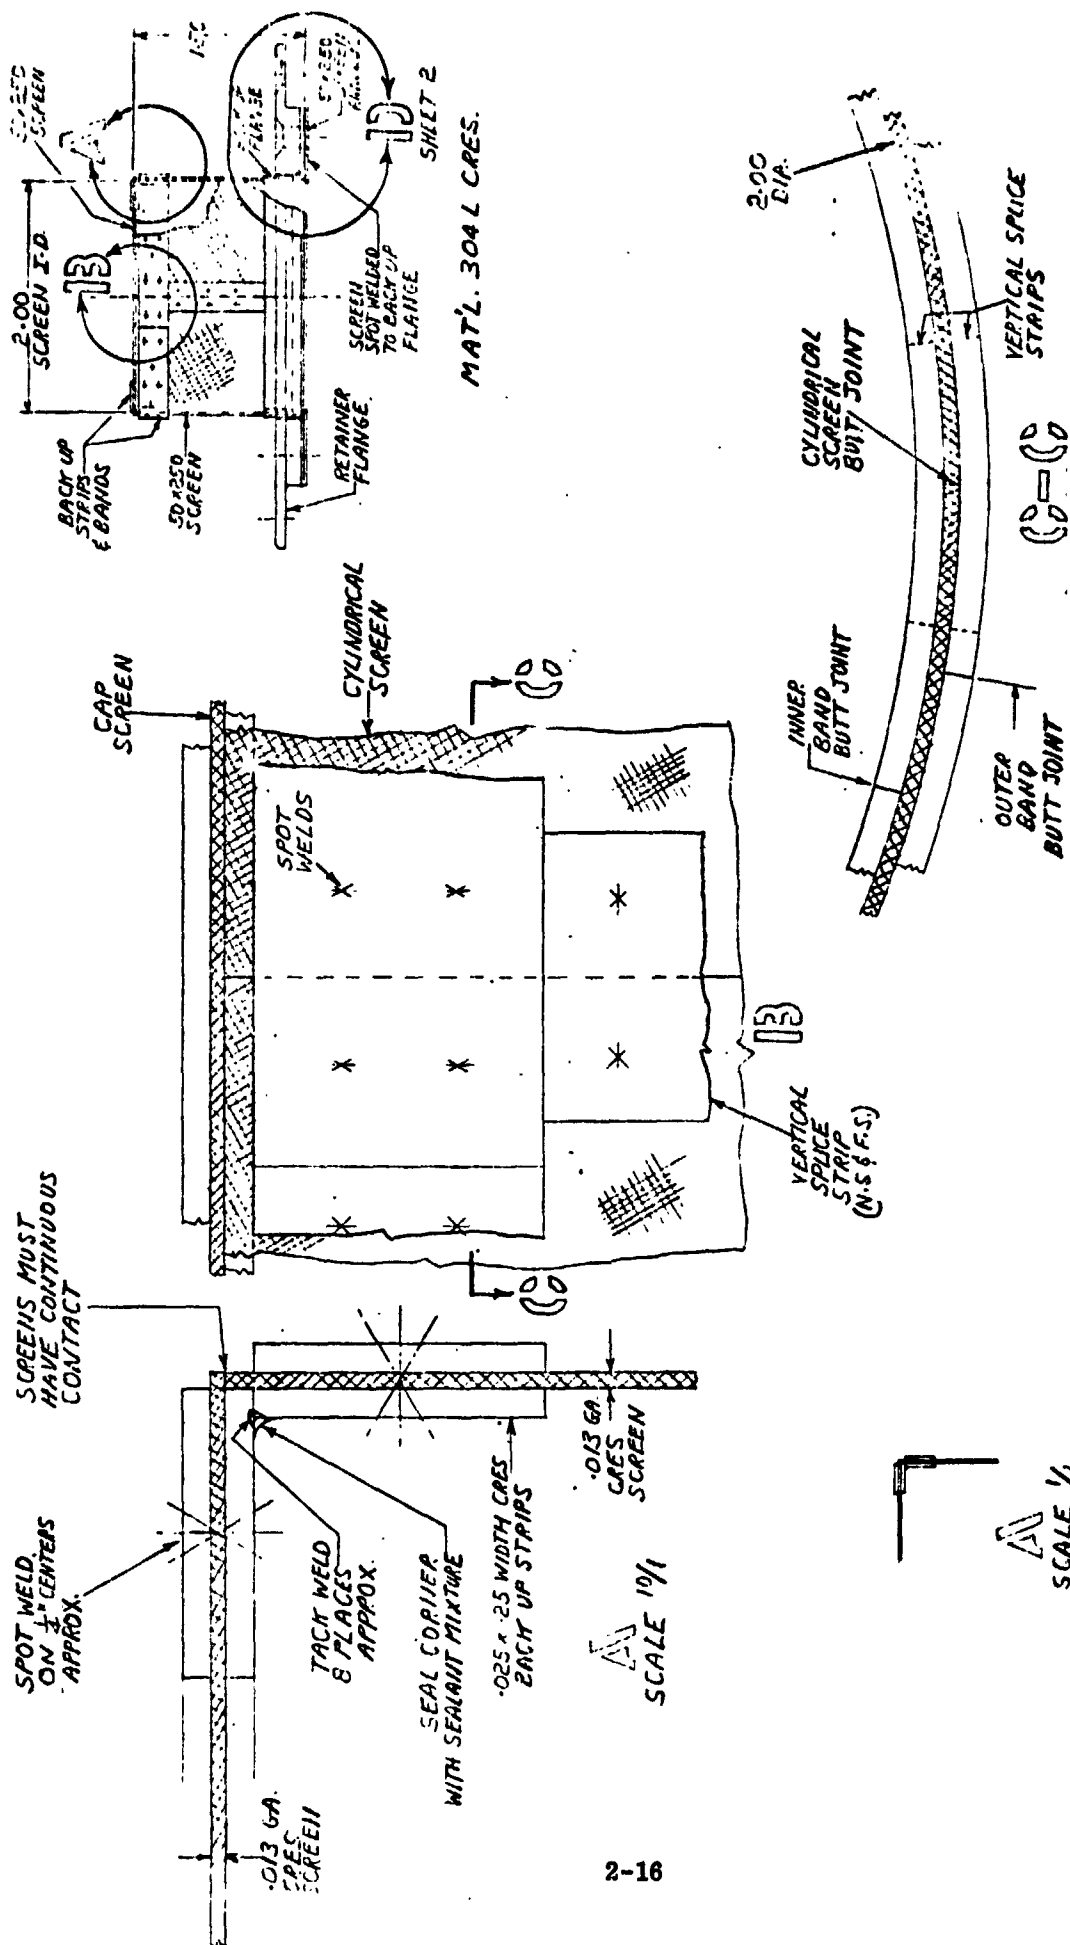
Standpipe Assembly/Refilling Test Apparatus (Sheet 1 of 2)
